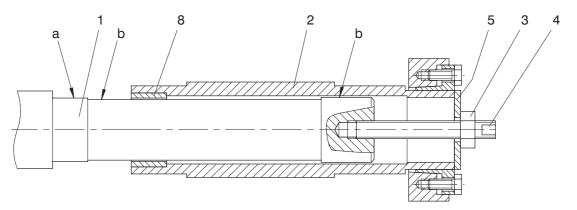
Mounting hollow shaft and shrink disk
